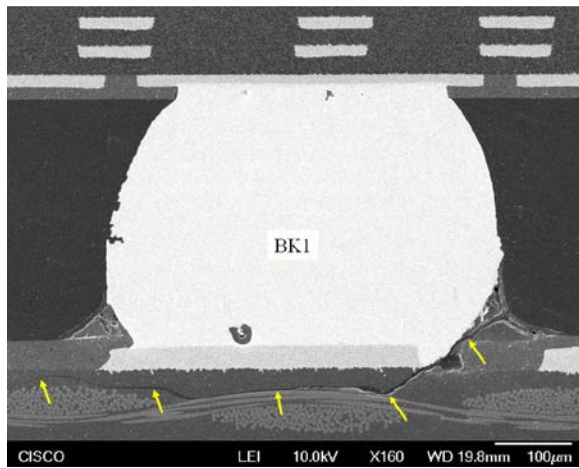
Partial pad cratering in the solder ball B1 in board # 41
